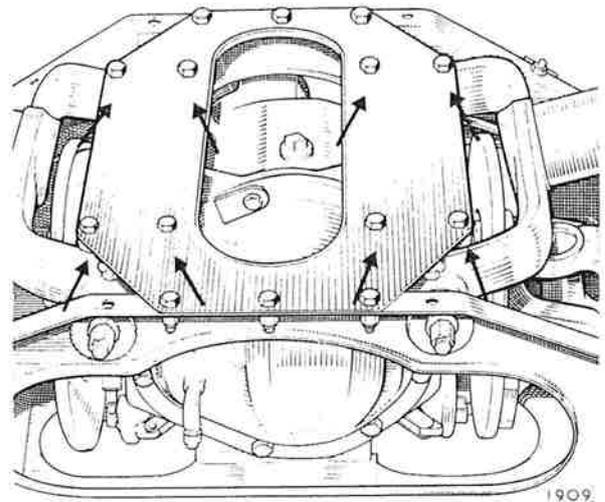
Showing the eight bolts which secure the tie plate to the inner fulcrum mounting bracket
